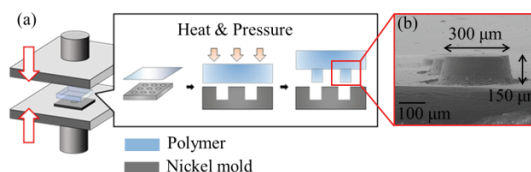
(a) Hot-embossing process, (b) FE-SEM image of PMMA cylindrical shape by hot-embossing process
